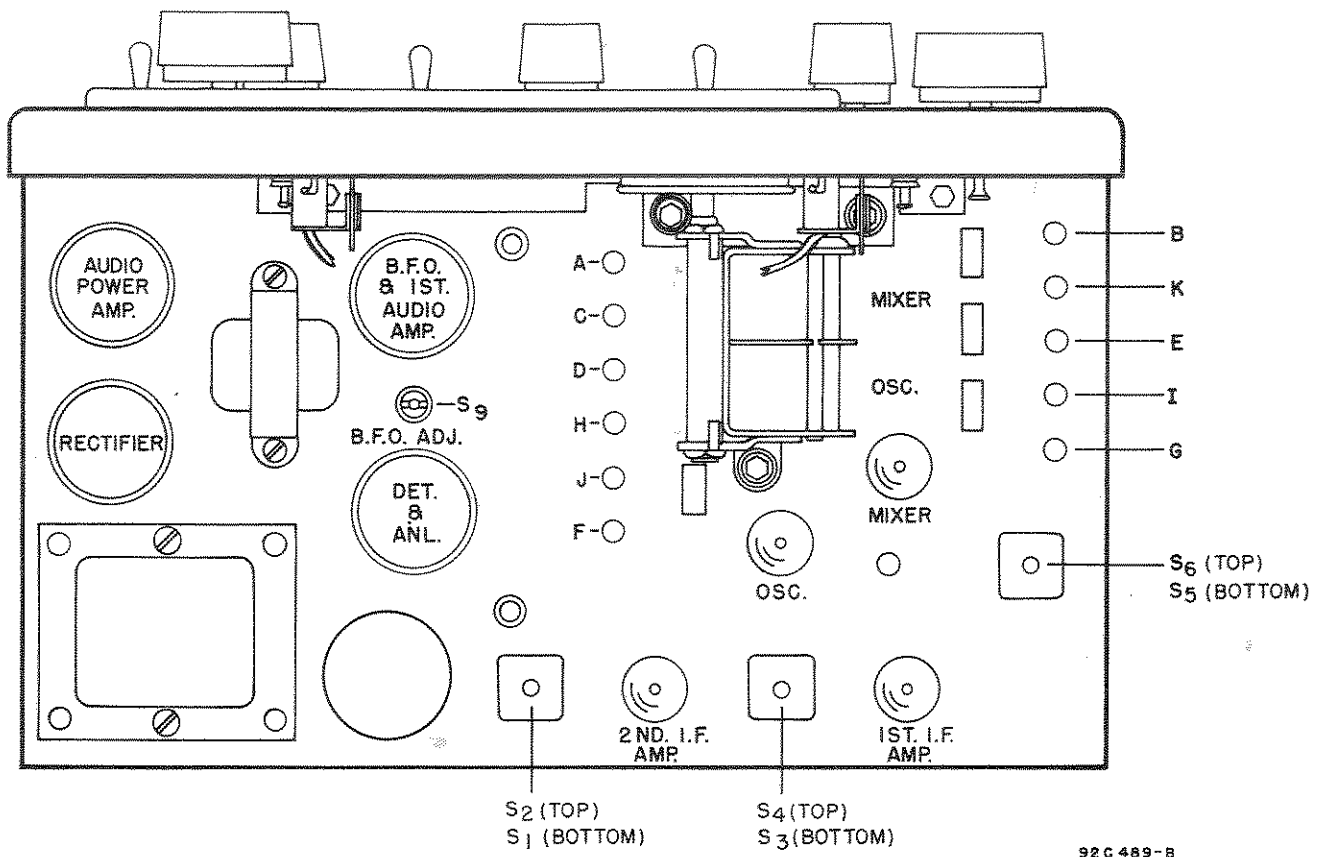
Top View of Chassis Showing Location of Alignment Adjustments
